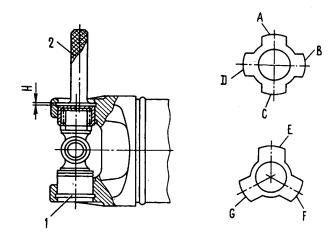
Assembling Universal Joint: 1 - lockring; 2 - gauge; H - clearance A, B, C, D, E, F, G - gauge blades of thickness, mm: 1.45; 1.48; 1.52; 1.56; 1.60; 1.64; 1.67
